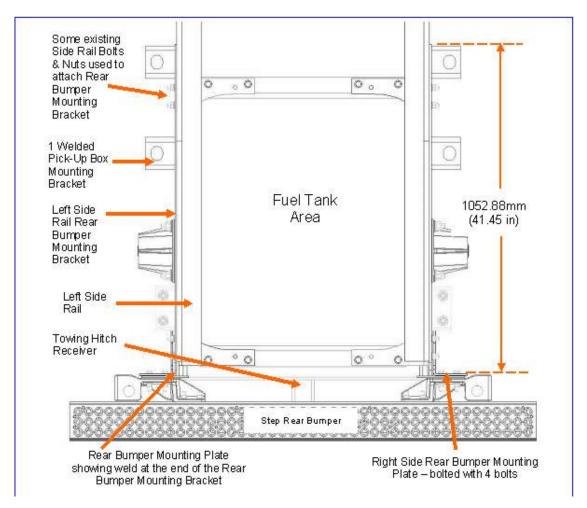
Plan View of Step Rear Bumper and Side Frame Rail Assemblies
